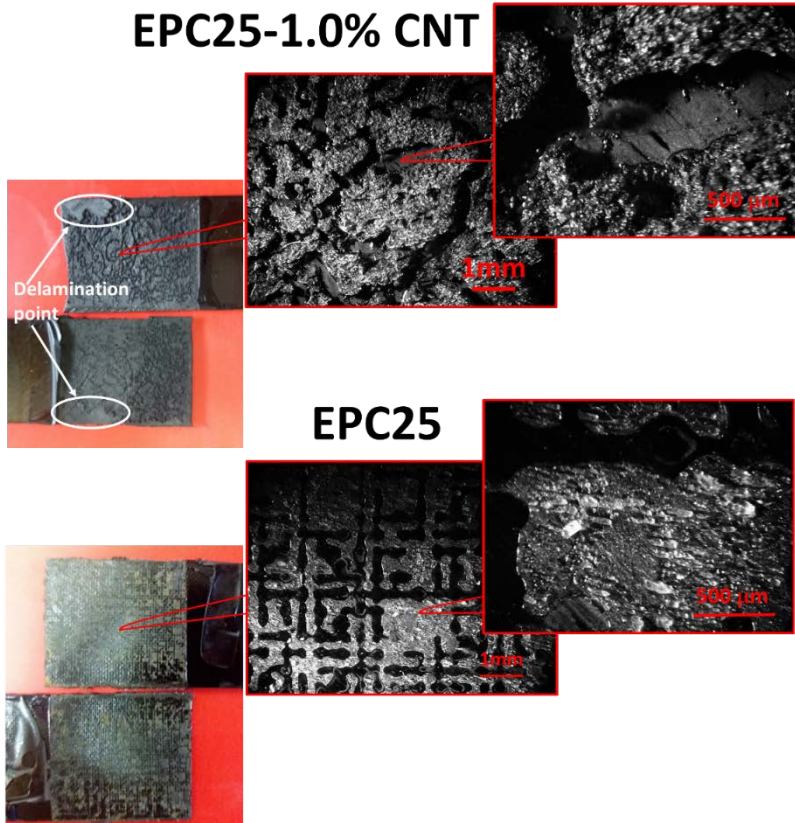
Optical images of fracture surfaces of the tested adhesive joints
